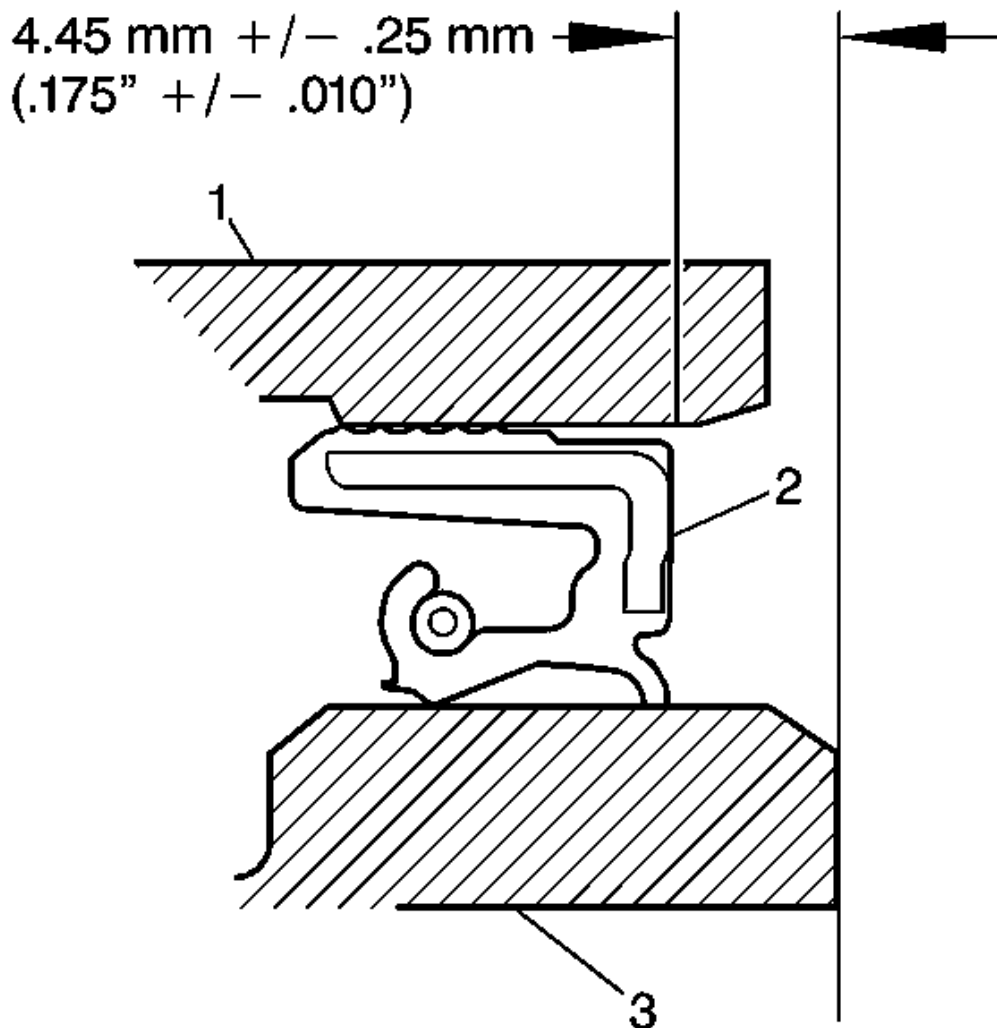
Crankshaft Rear Oil Seal Install Dimension
